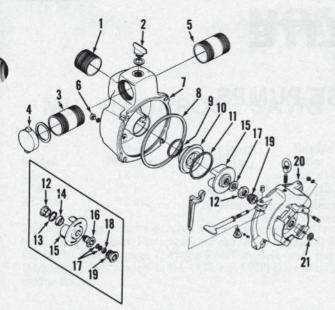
Exploded view of Model DTP4-1 trash pump. Models 160TP4-1, 160TP4-1A and 160TP4-1B are similar. Model 123TP4 is similar except for impeller assembly shown in inset.
